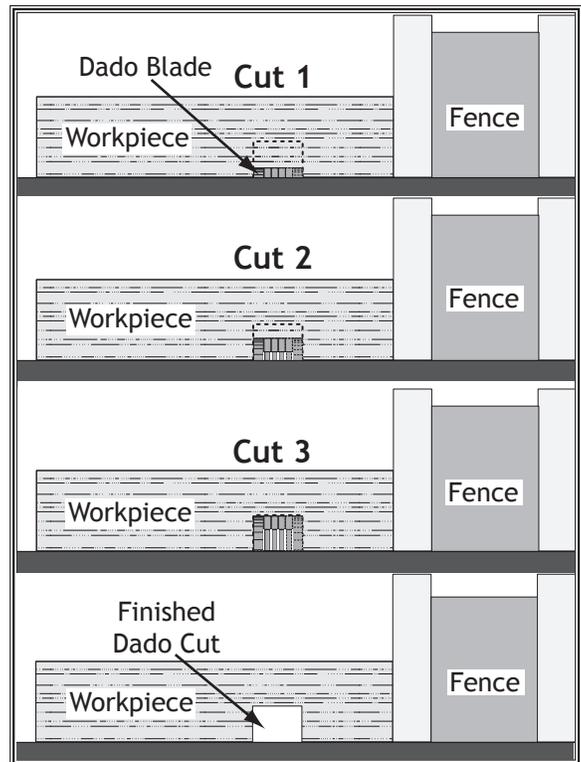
Example of dado being cut with multiple light cuts, instead of one deep cut.
